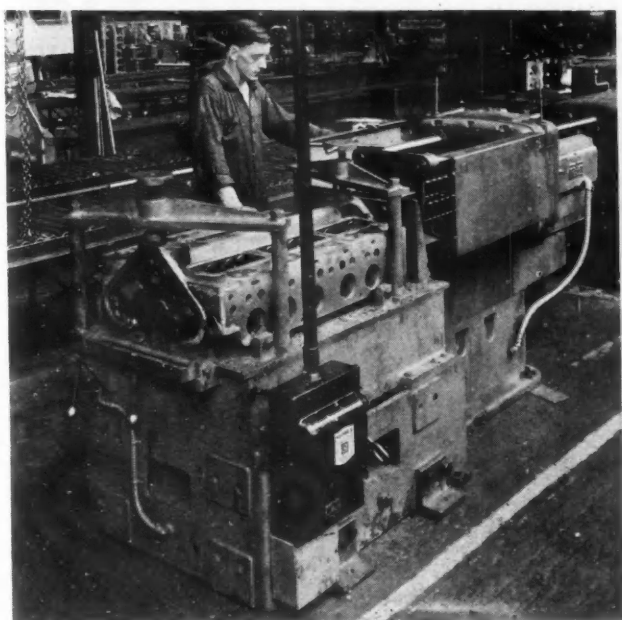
Biggest job of this one-way drilling machine is the drilling of four longitudinal oil holes. They are drilled half way through in one setting—the rest of the way later in the same machine
